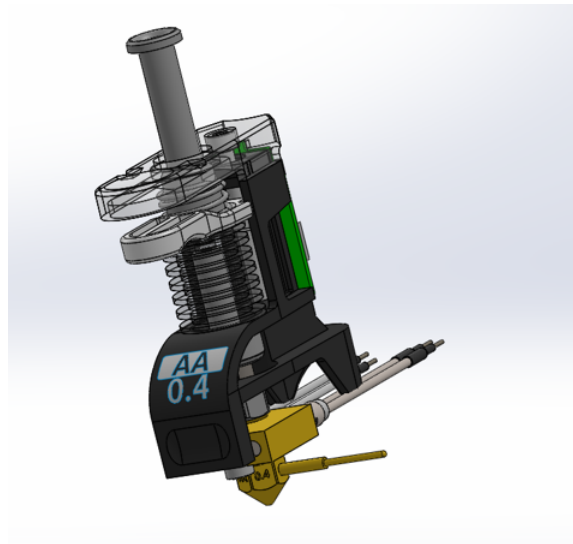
Modified nozzle inside a standard Ultimaker print core.
